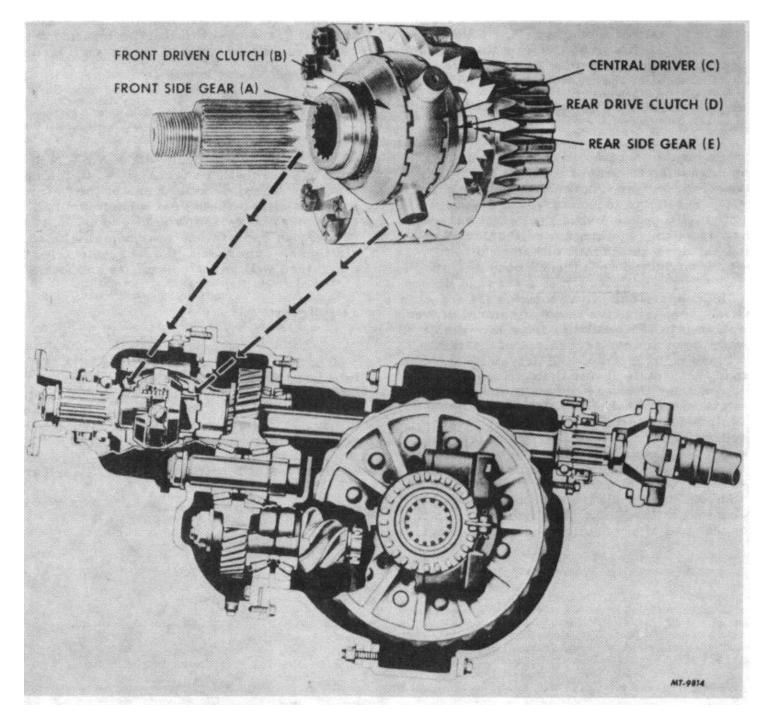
Cutaway View of Tandem Lock NoSPIN Inter-Axle Differential
